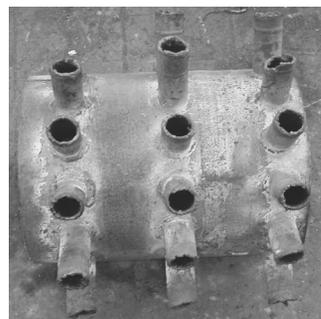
Material for investigations in the form of 13CrMo4-5 (15HM) steel homogeneous circumferential welded joint of II° secondary steam superheater header shell after 140,000 h service
